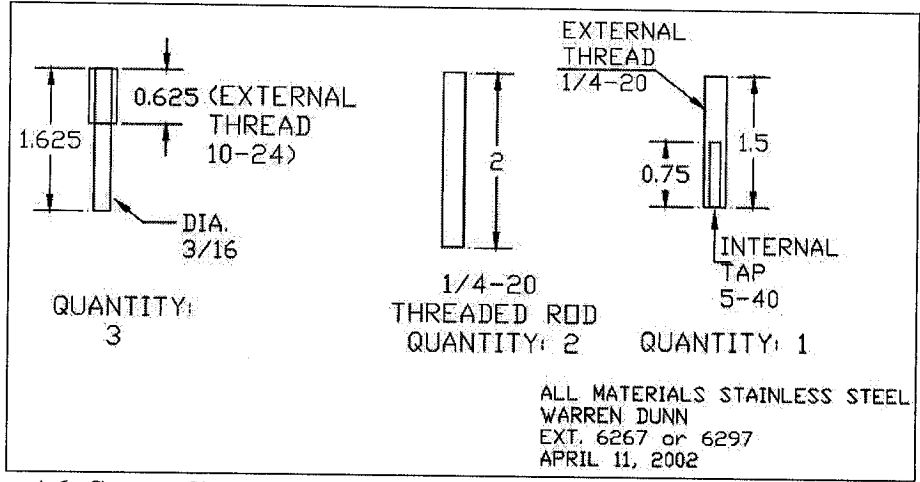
Step-cylinder anchors and pins. All dimensions in inches.
